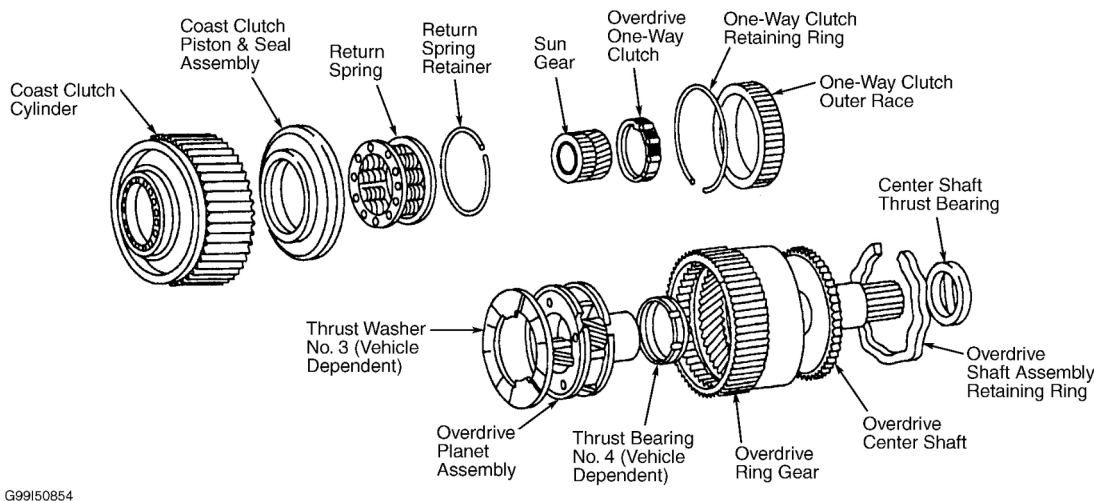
Exploded View Of Coast Clutch/Overdrive One-Way Clutch Assembly
